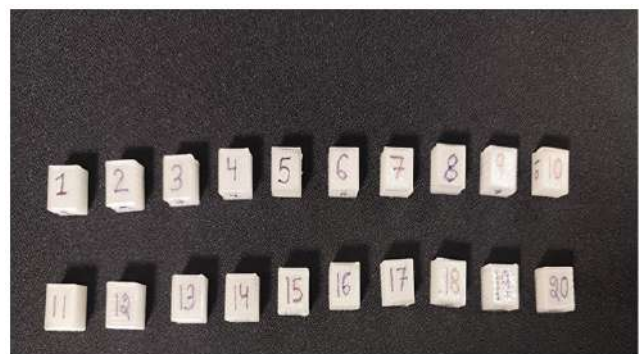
(b): ASTM Standard Compression 3D printed Specimen
